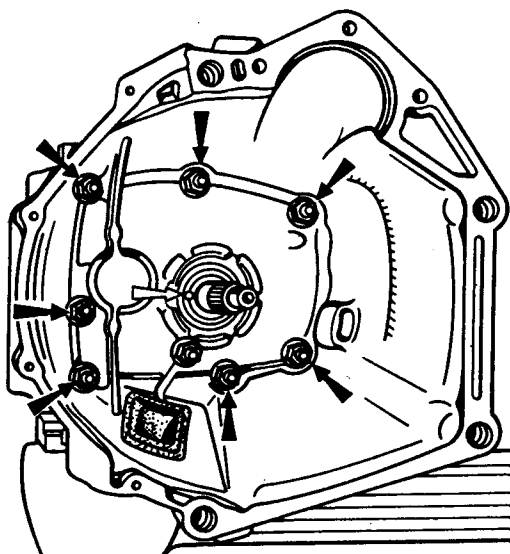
Clutch Housing, Inside View. Black arrows show housing-to-gearbox nuts. White arrow shows hole in front cover for draining oil from gearbox housing to prevent oiling of clutch discs
